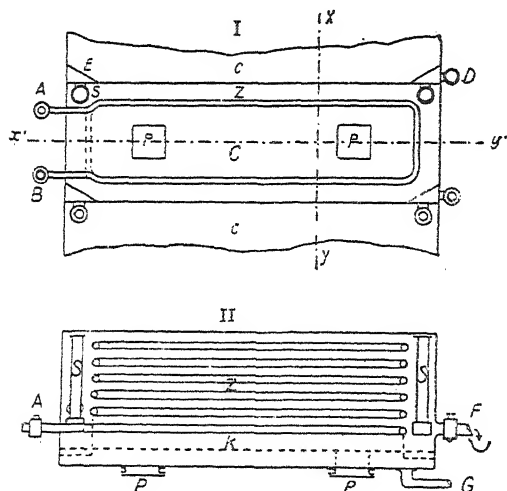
Section and plan of a lixiviating tank, or "cachuco".
